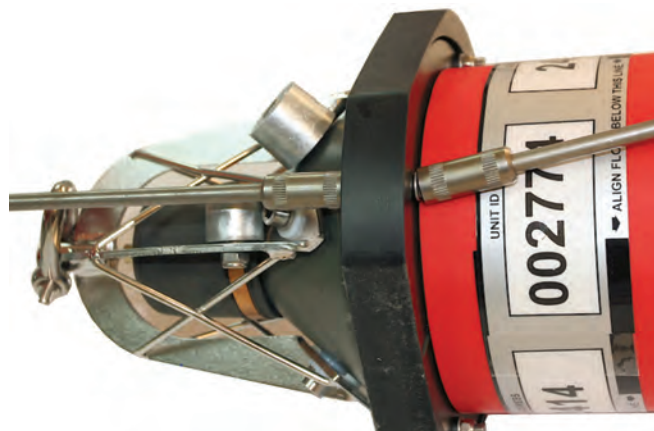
Fitment of Clamp Rings and Bumper Stop
